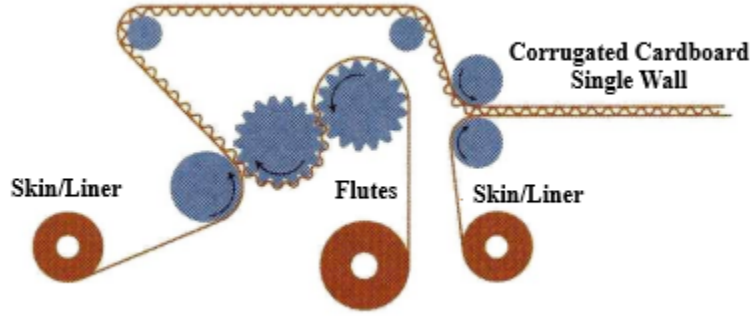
Manufacturing of single wall of corrugated cardboard [1]
